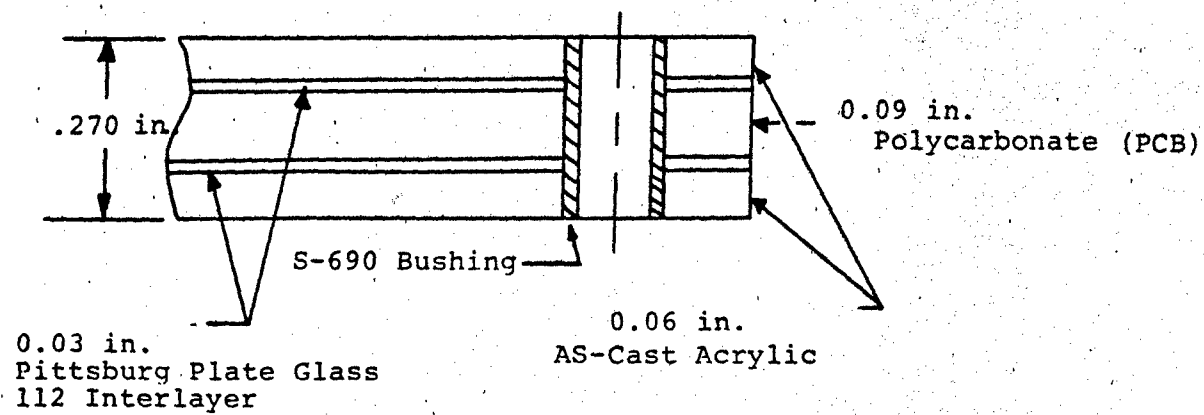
SIDE PANEL CONSTRUCTION, (Acrylic Sandwich)
